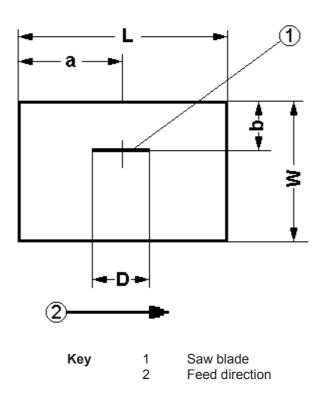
Saw bench table minimum dimensions on dual-purpose circular sawing machines for firewood/circular saw benches
